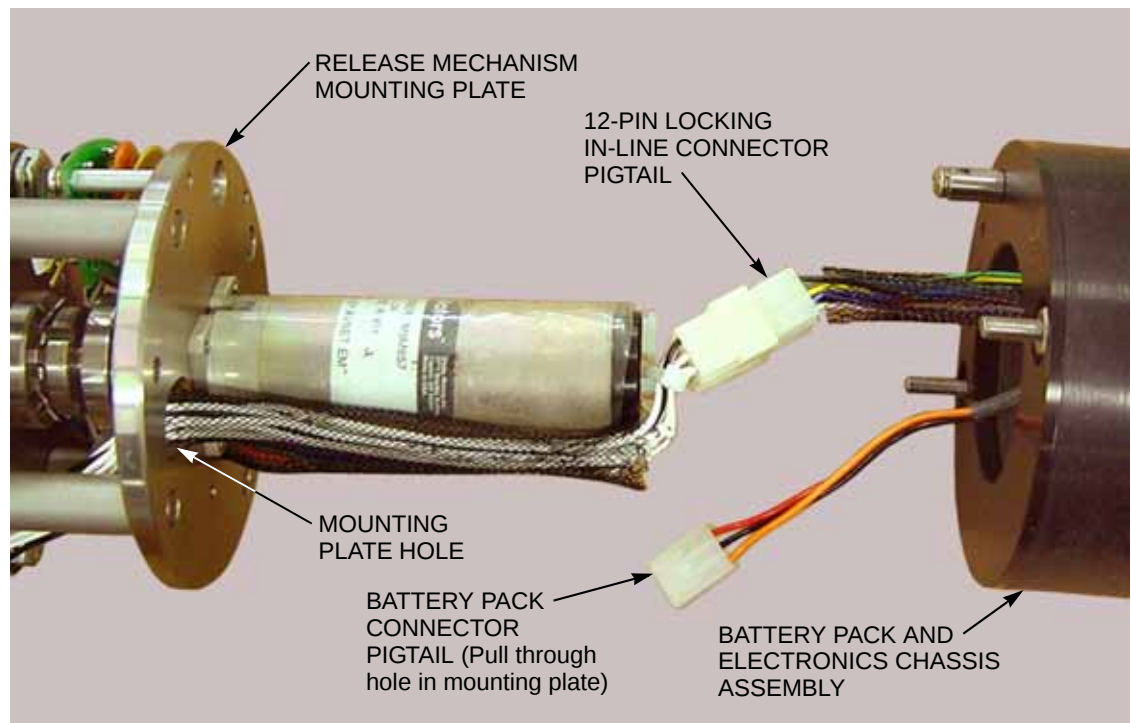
Location of Release Mechanism Mounting Plate Hardware, Battery Pack and Electronics Chassis Assembly, and Limit Switches
